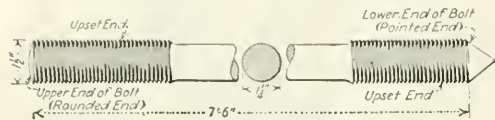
ROD ENLARGED, OR "UPSET," AT THREADED ENDS
